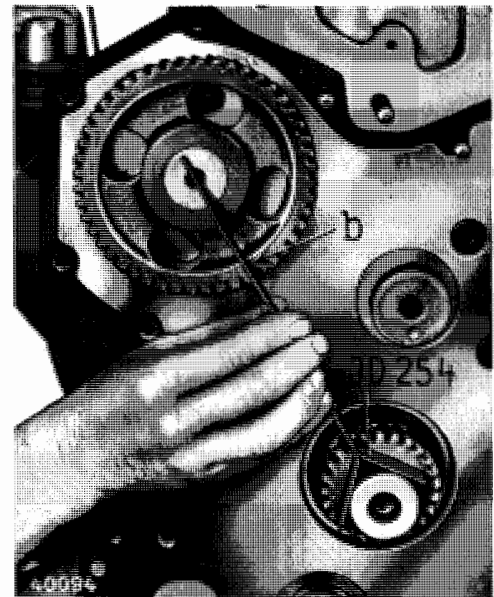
Timing Camshaft Gear by means of Timing Tool No. JD 254
